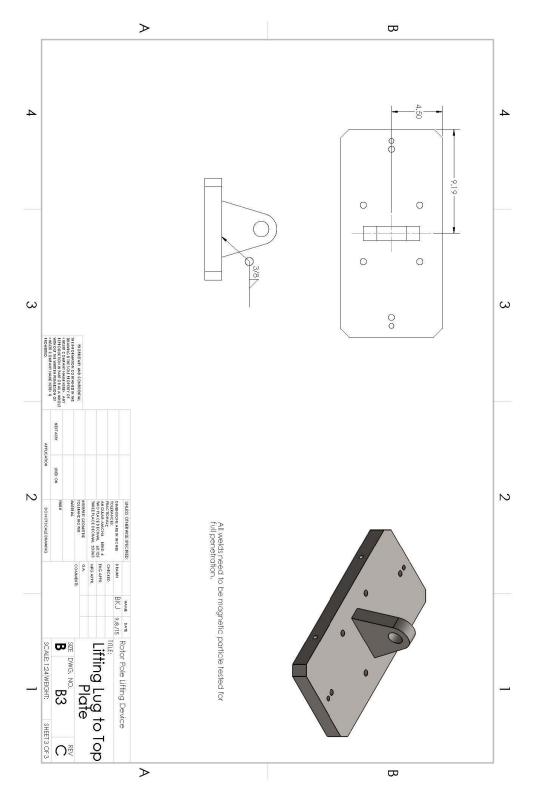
DRAWING OF LIFTING LUG TO TOP PLATE
